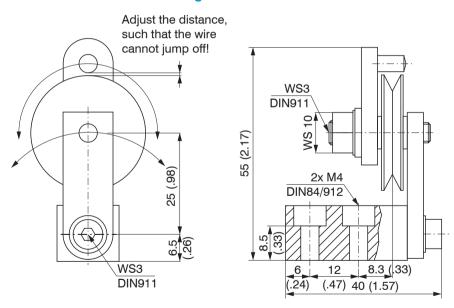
Deflection pulley TR1-WDS with mounting foot, dimensions in mm (inches, rounded off)
